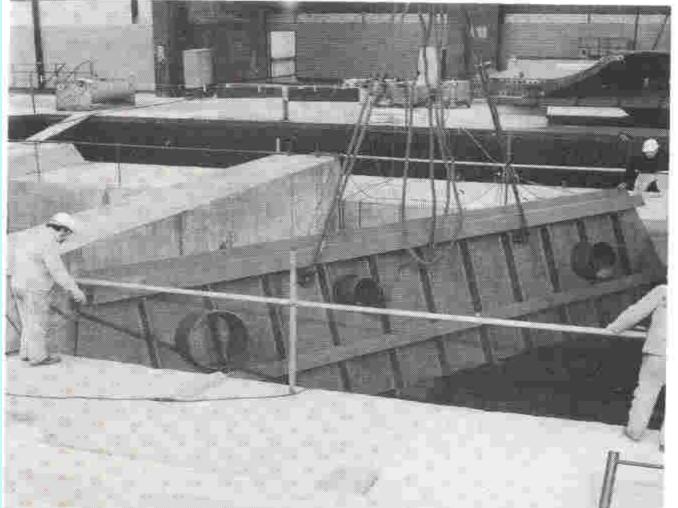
Lifting Attachment for the Assembly of an LP Casing End Wall
